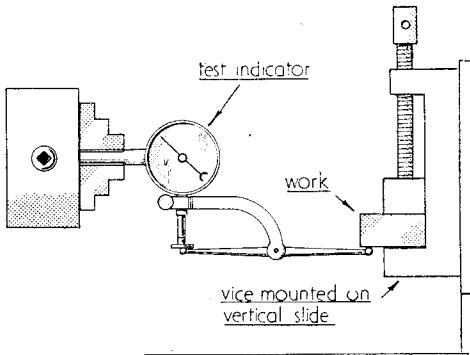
The reverse attachment of the indicator used for aligning the vice
